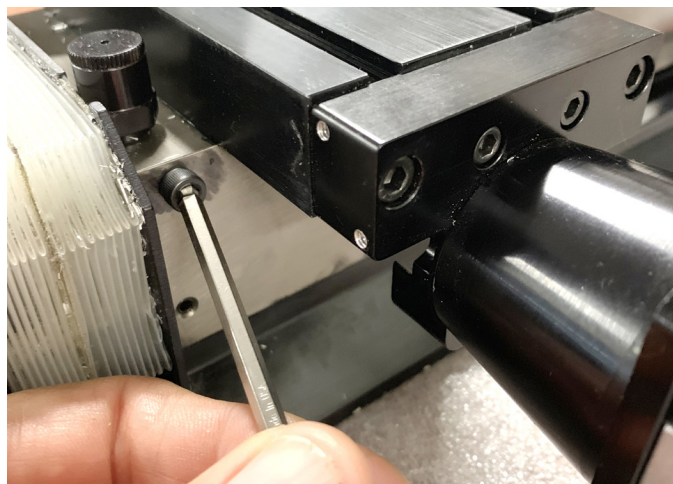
Thread the 10-32 x 7/16" Phillips flat-head screw* with the 10-32 hex nut into the side hole on the saddle. If there is a set screw in this hole, remove it first, then thread in the 10-32.
